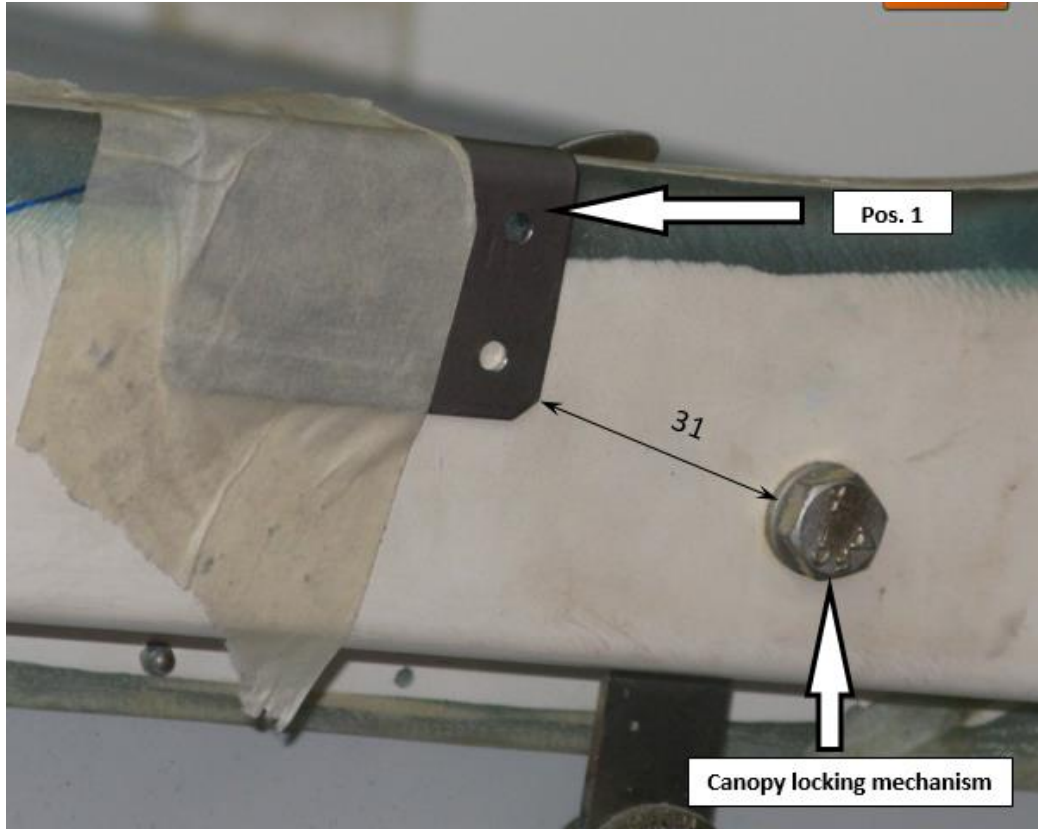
Positioning of the protective metal plate on the fixed frame (view of the left side of the cockpit)
